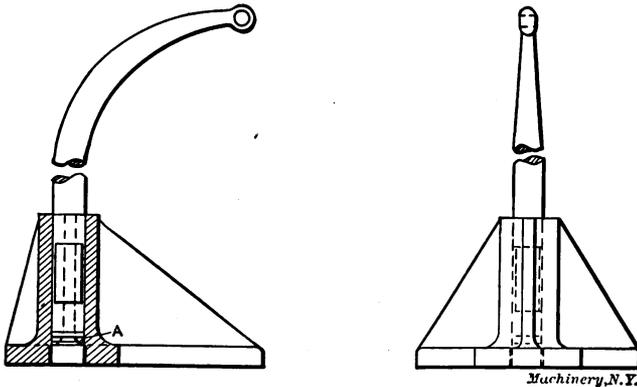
Small Individual Crane provided with Ball Thrust Bearing
